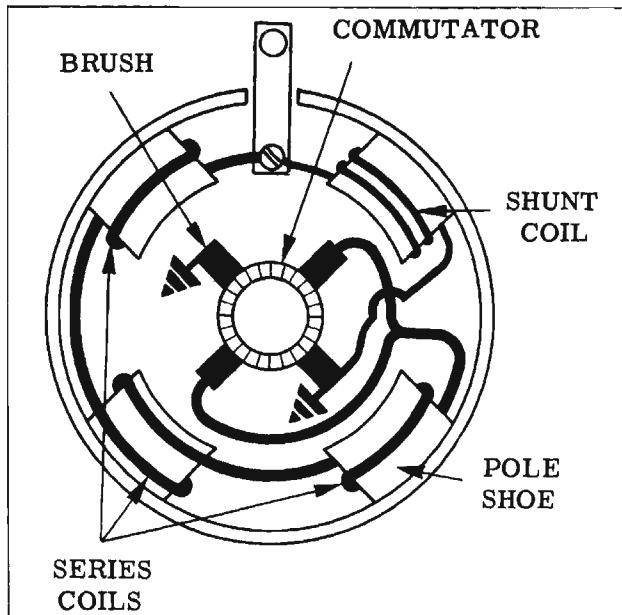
Field Windings (88 Regular Fuel and F-85)
